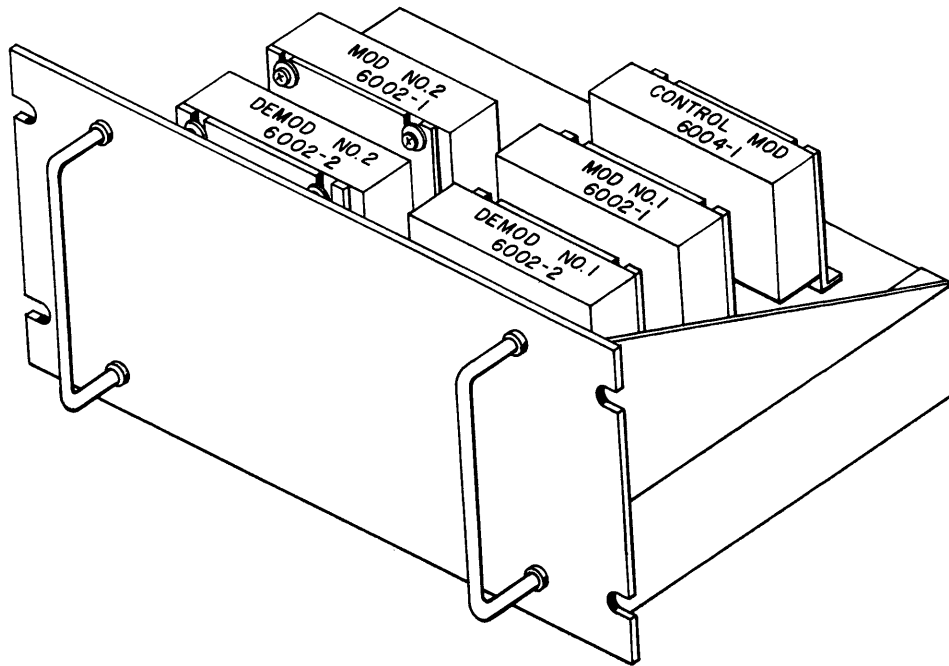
KW-26 Tone Converter Drawer, Right Hand, Isometric View
